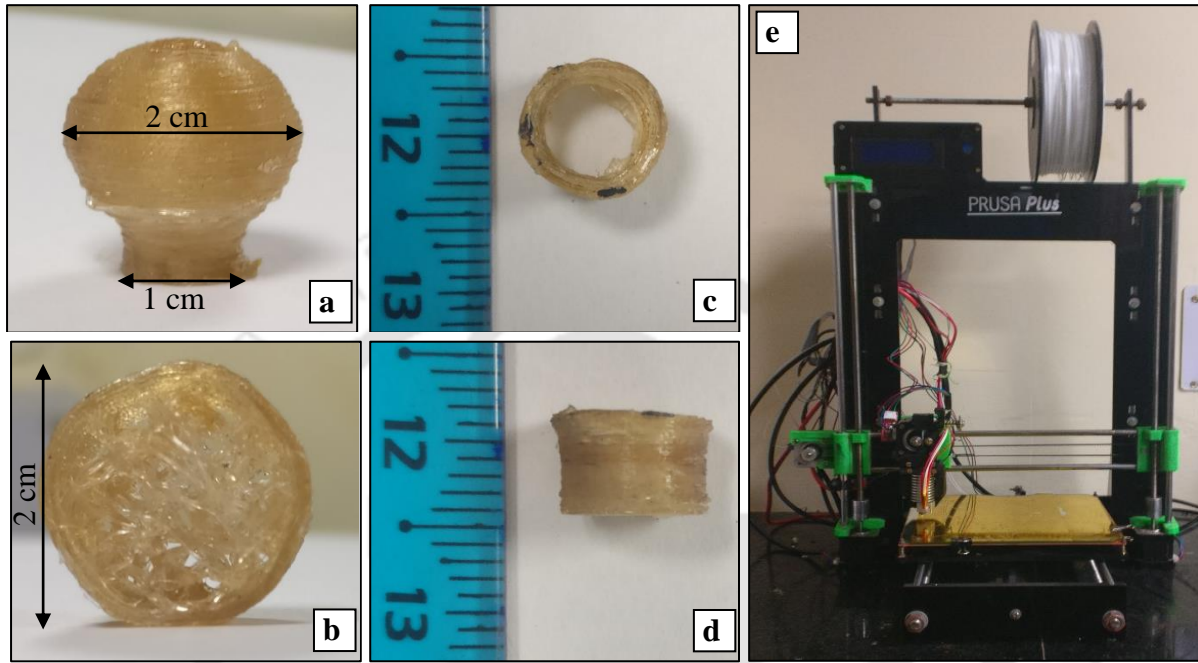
FDM printed SMPU in different shapes: (a) aneurysm, (b) cylinder (2cm dia) with web-like structure in the lumen, (c) lateral view: stent (cylinder); (d) longitudinal view: stent; (e) Prusa i3 3D printer
